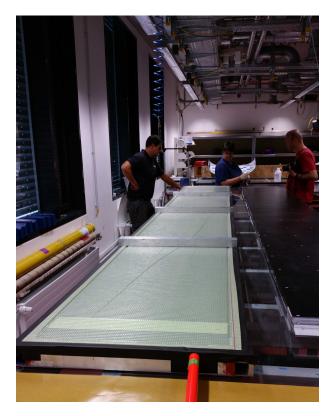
The vacuum press assembly overtop of the panel during the first pressing step.
